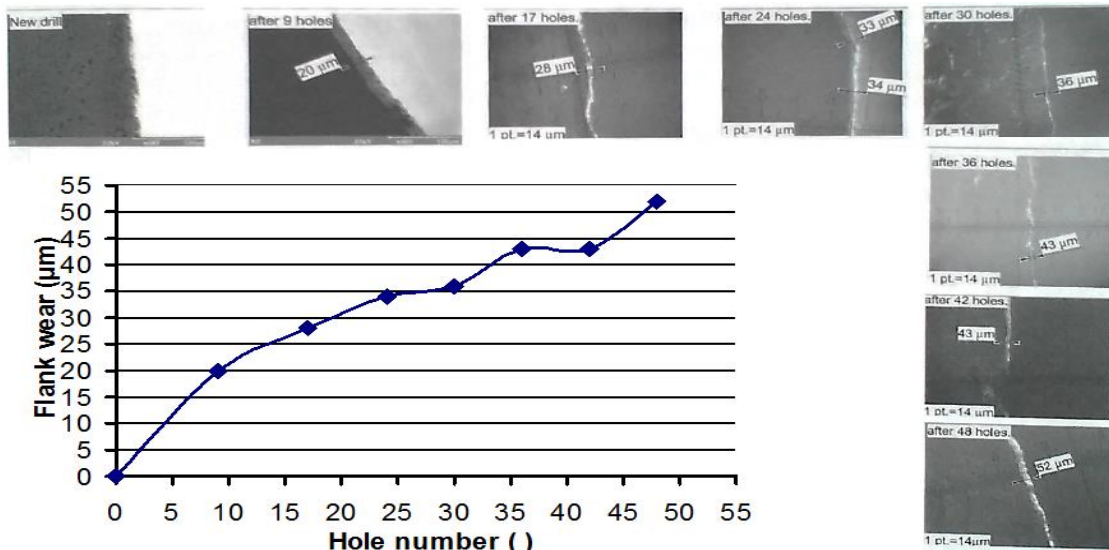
Progress of Flank Wear during CFRP/ steel Stack Machining
